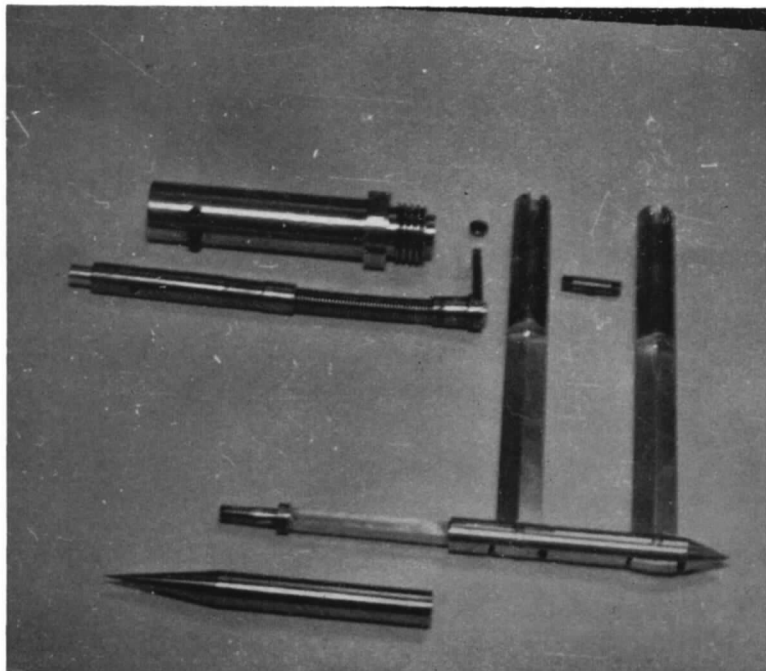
Components of the forcing gear (Model, sting and supports, gudgeon pin, spring assembly and tube, hemisphere).
